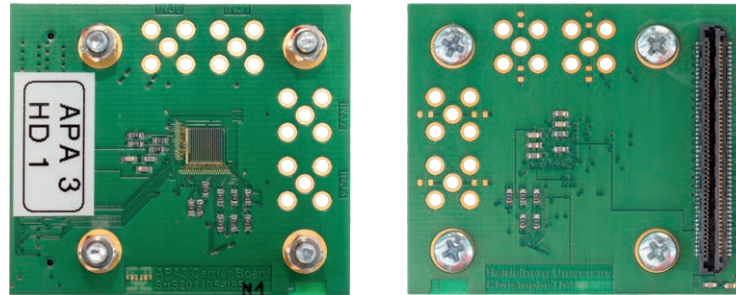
APA 3 carrier board with wirebonded ASIC on the top side (left) and connector to the frontend board on the bottom side (right).
